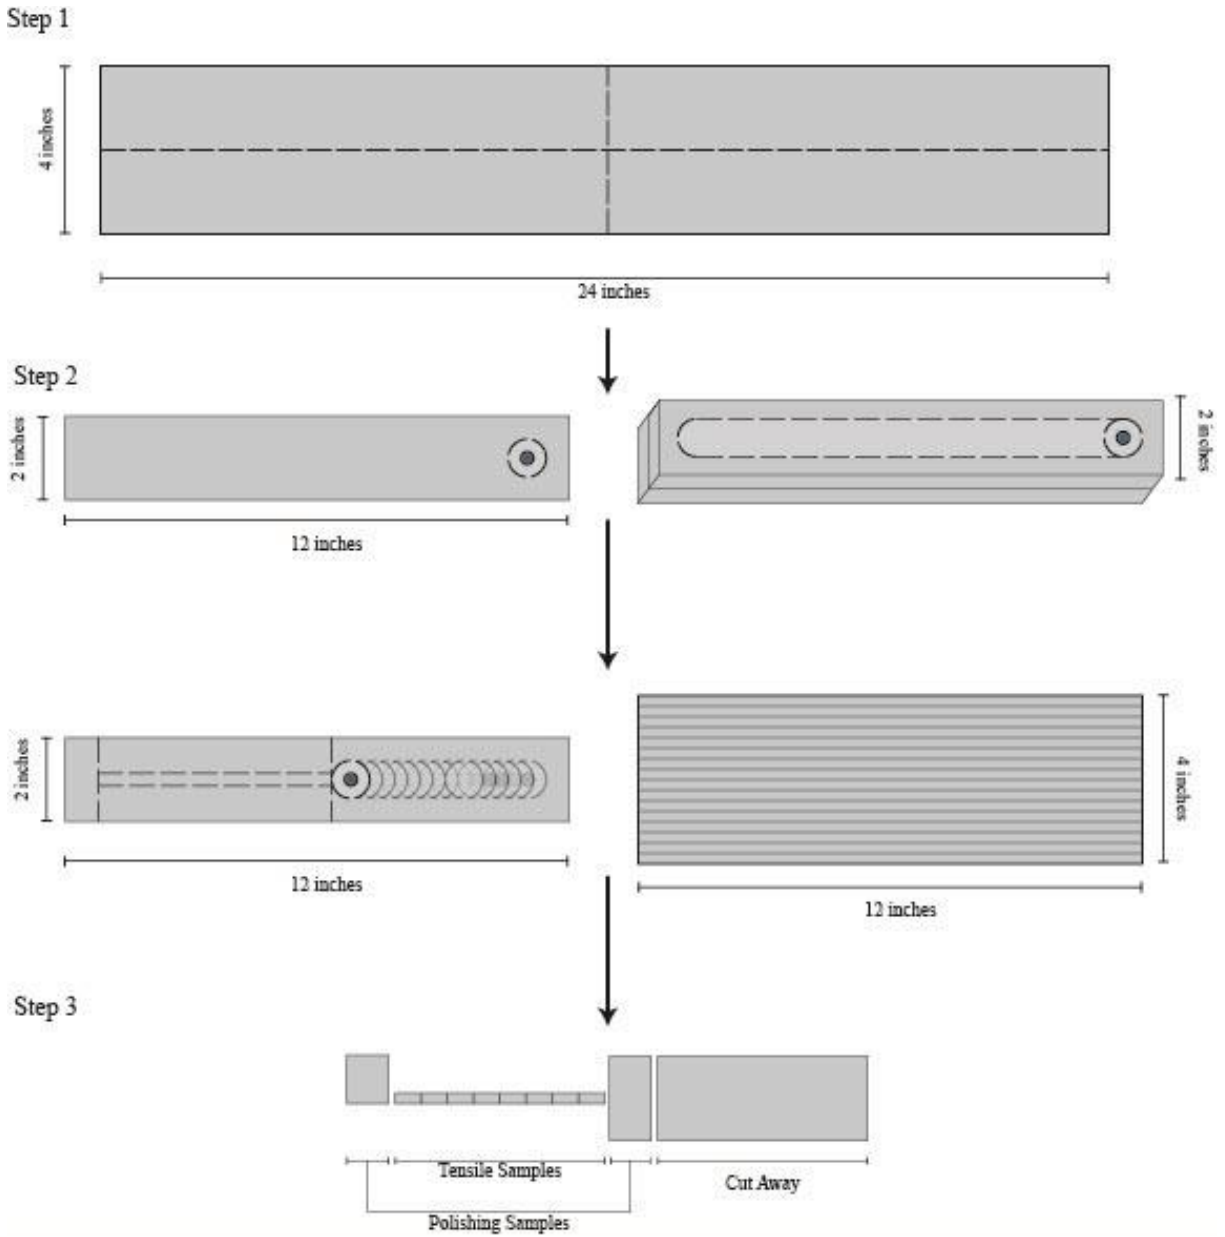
The final component started as four 4 inch by 24 inch panels which were cut, welded, and machined for testing.
